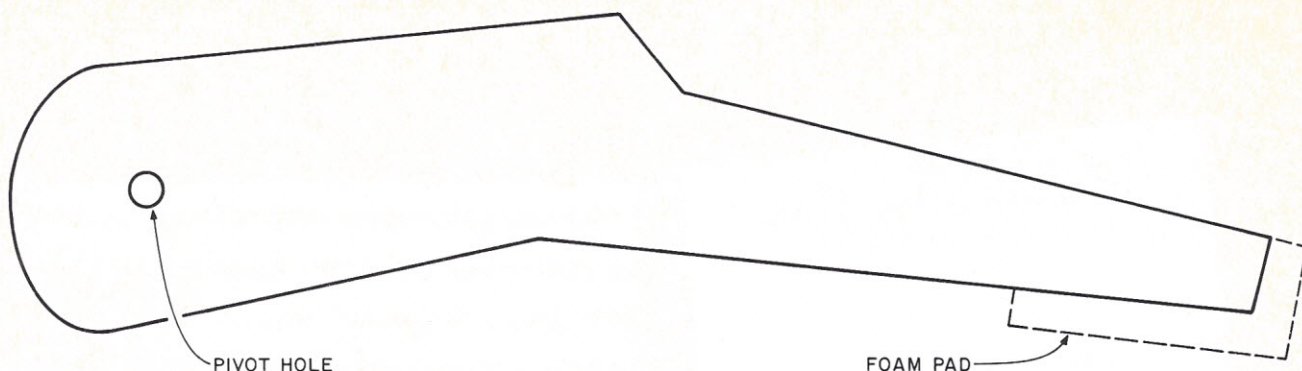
This actual-size finger pattern can be used to trace over the material being used for construction. The pivot hole should match the size of the pivot shaft being used.
